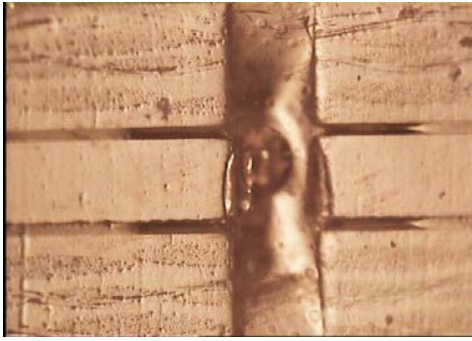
Cross section of mechanically drilled 0.3 mm diameter via through the hybrid-assembly without any damage
